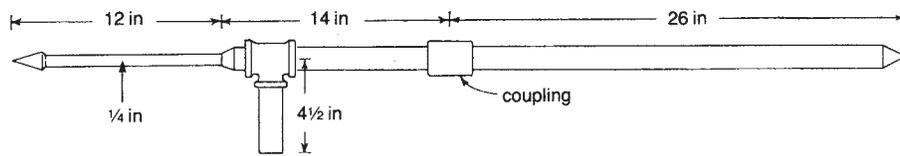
A probe for locating pocket gopher tunnels can be built in a shop. The shaft may be in one piece or divided by pipe coupling for convenient carrying when it is not in use. (Drawing not to scale.)
